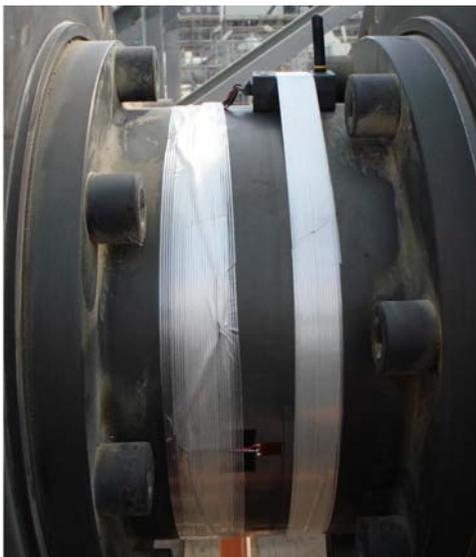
Strain Gage Telemetry System Installed on Coupling Spool Piece.
